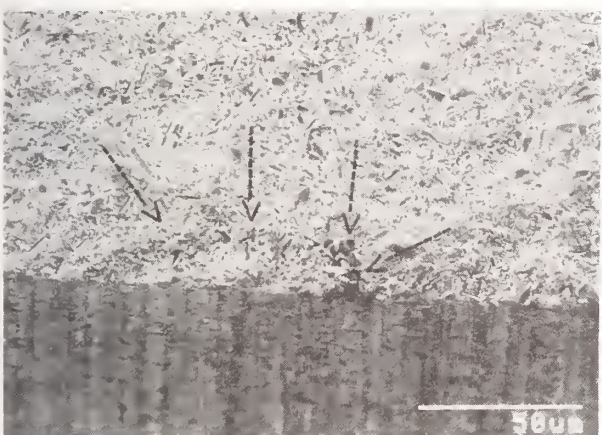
Fracture surfaces of RBSN and SRBSN specimens with possible machining damage as the cause of failure.
